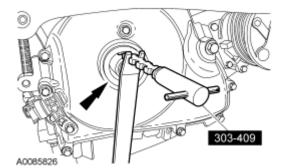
Locating Crankshaft Front Oil Seal And Special Tool (303-409) Courtesy of FORD MOTOR CO.
